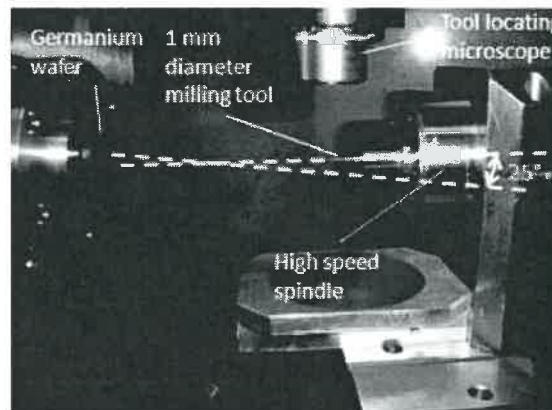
Moore 350FG machining setup, showing the rotation axis of the high speed spindle and milling tool, tilted by 25° relative to the C-axis, on which the sample is mounted.
